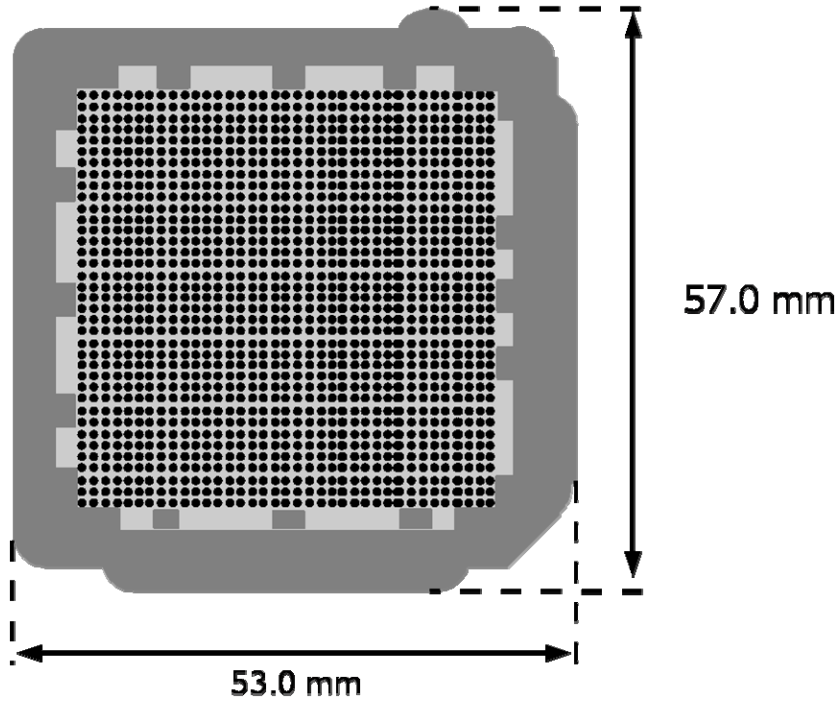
Illustration of elastomer socket, showing dimensions. The 37 x 37 contact array and main housing features are also shown
